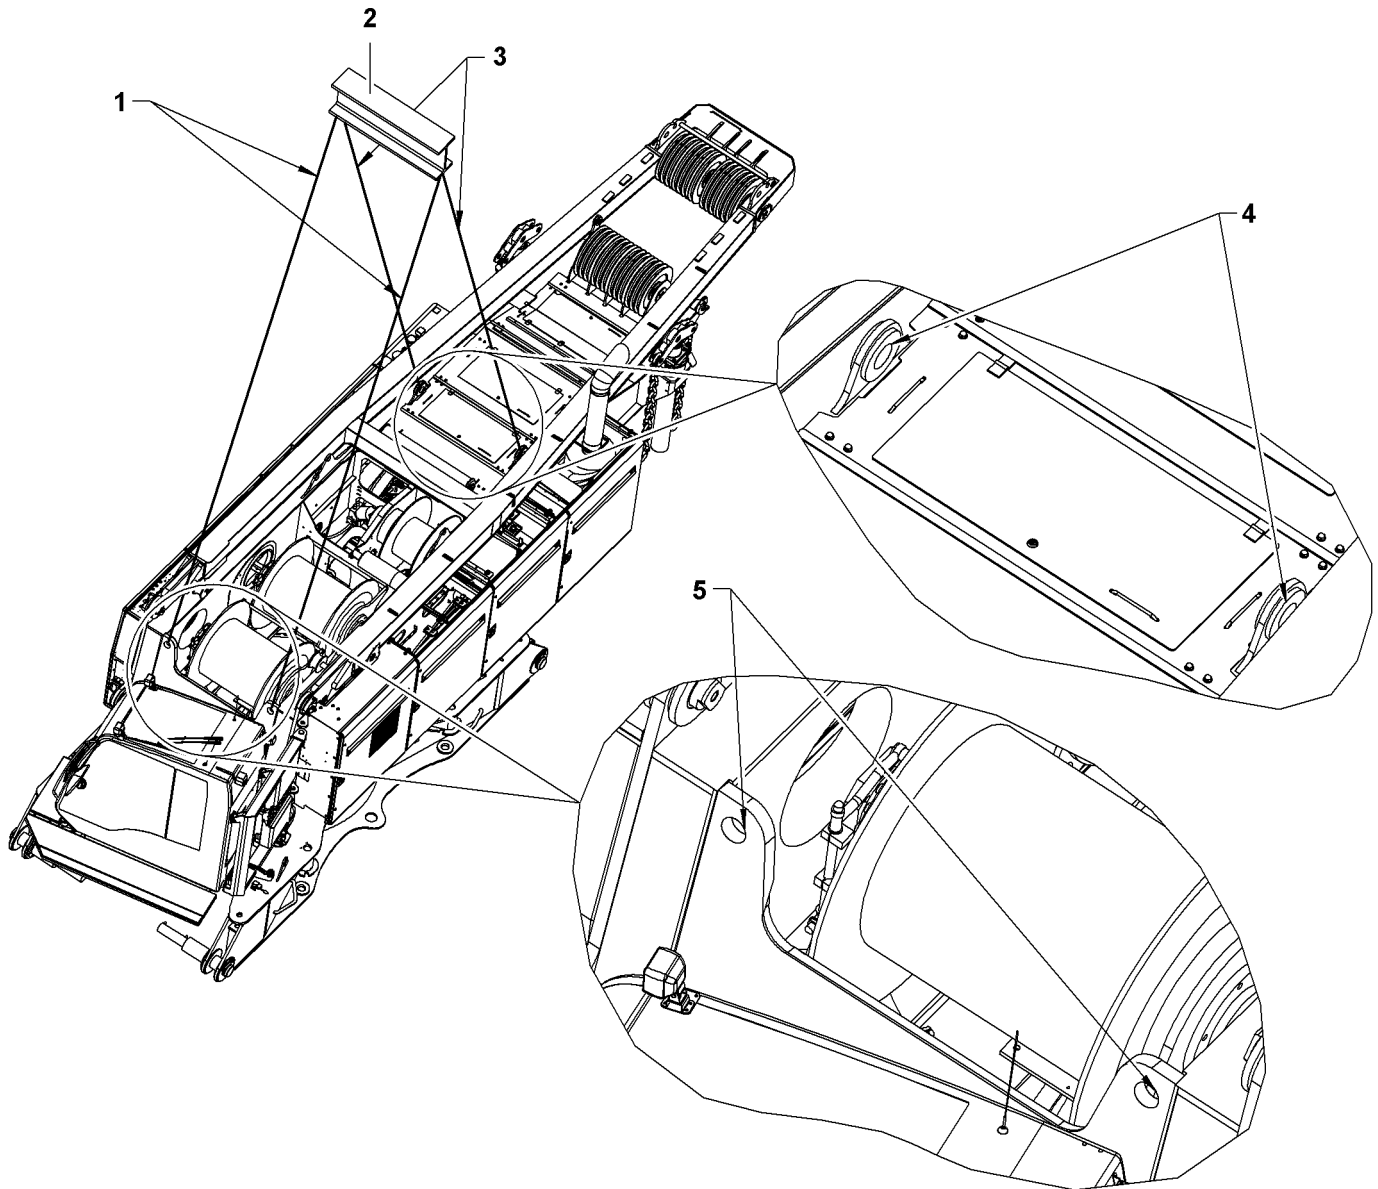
Loading the basic machine without crawler side frame, carbody counterweight and rear counterweight - lifting points
